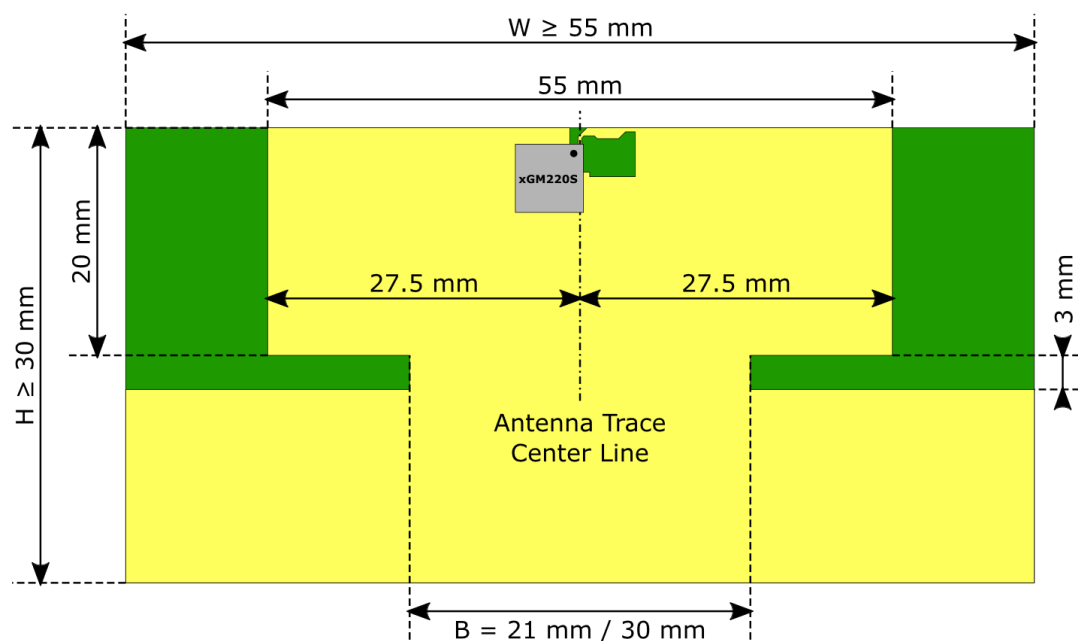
Recommended PCB Layout for Extended W & H Dimensions – Wide Metal Keep-Outs
